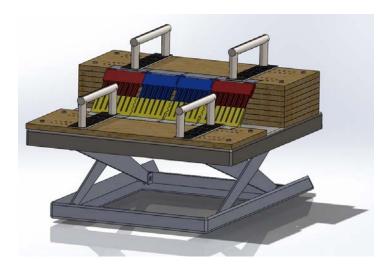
Solidworks 2011 CAD Drawing of the Height Adjustable Ramp Assembled to the Transfer
